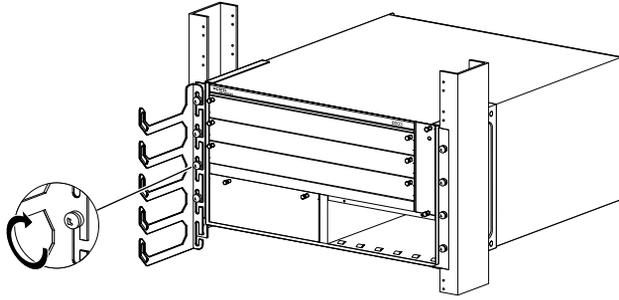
Securing the cable guide to the chassis: 8003 Chassis
